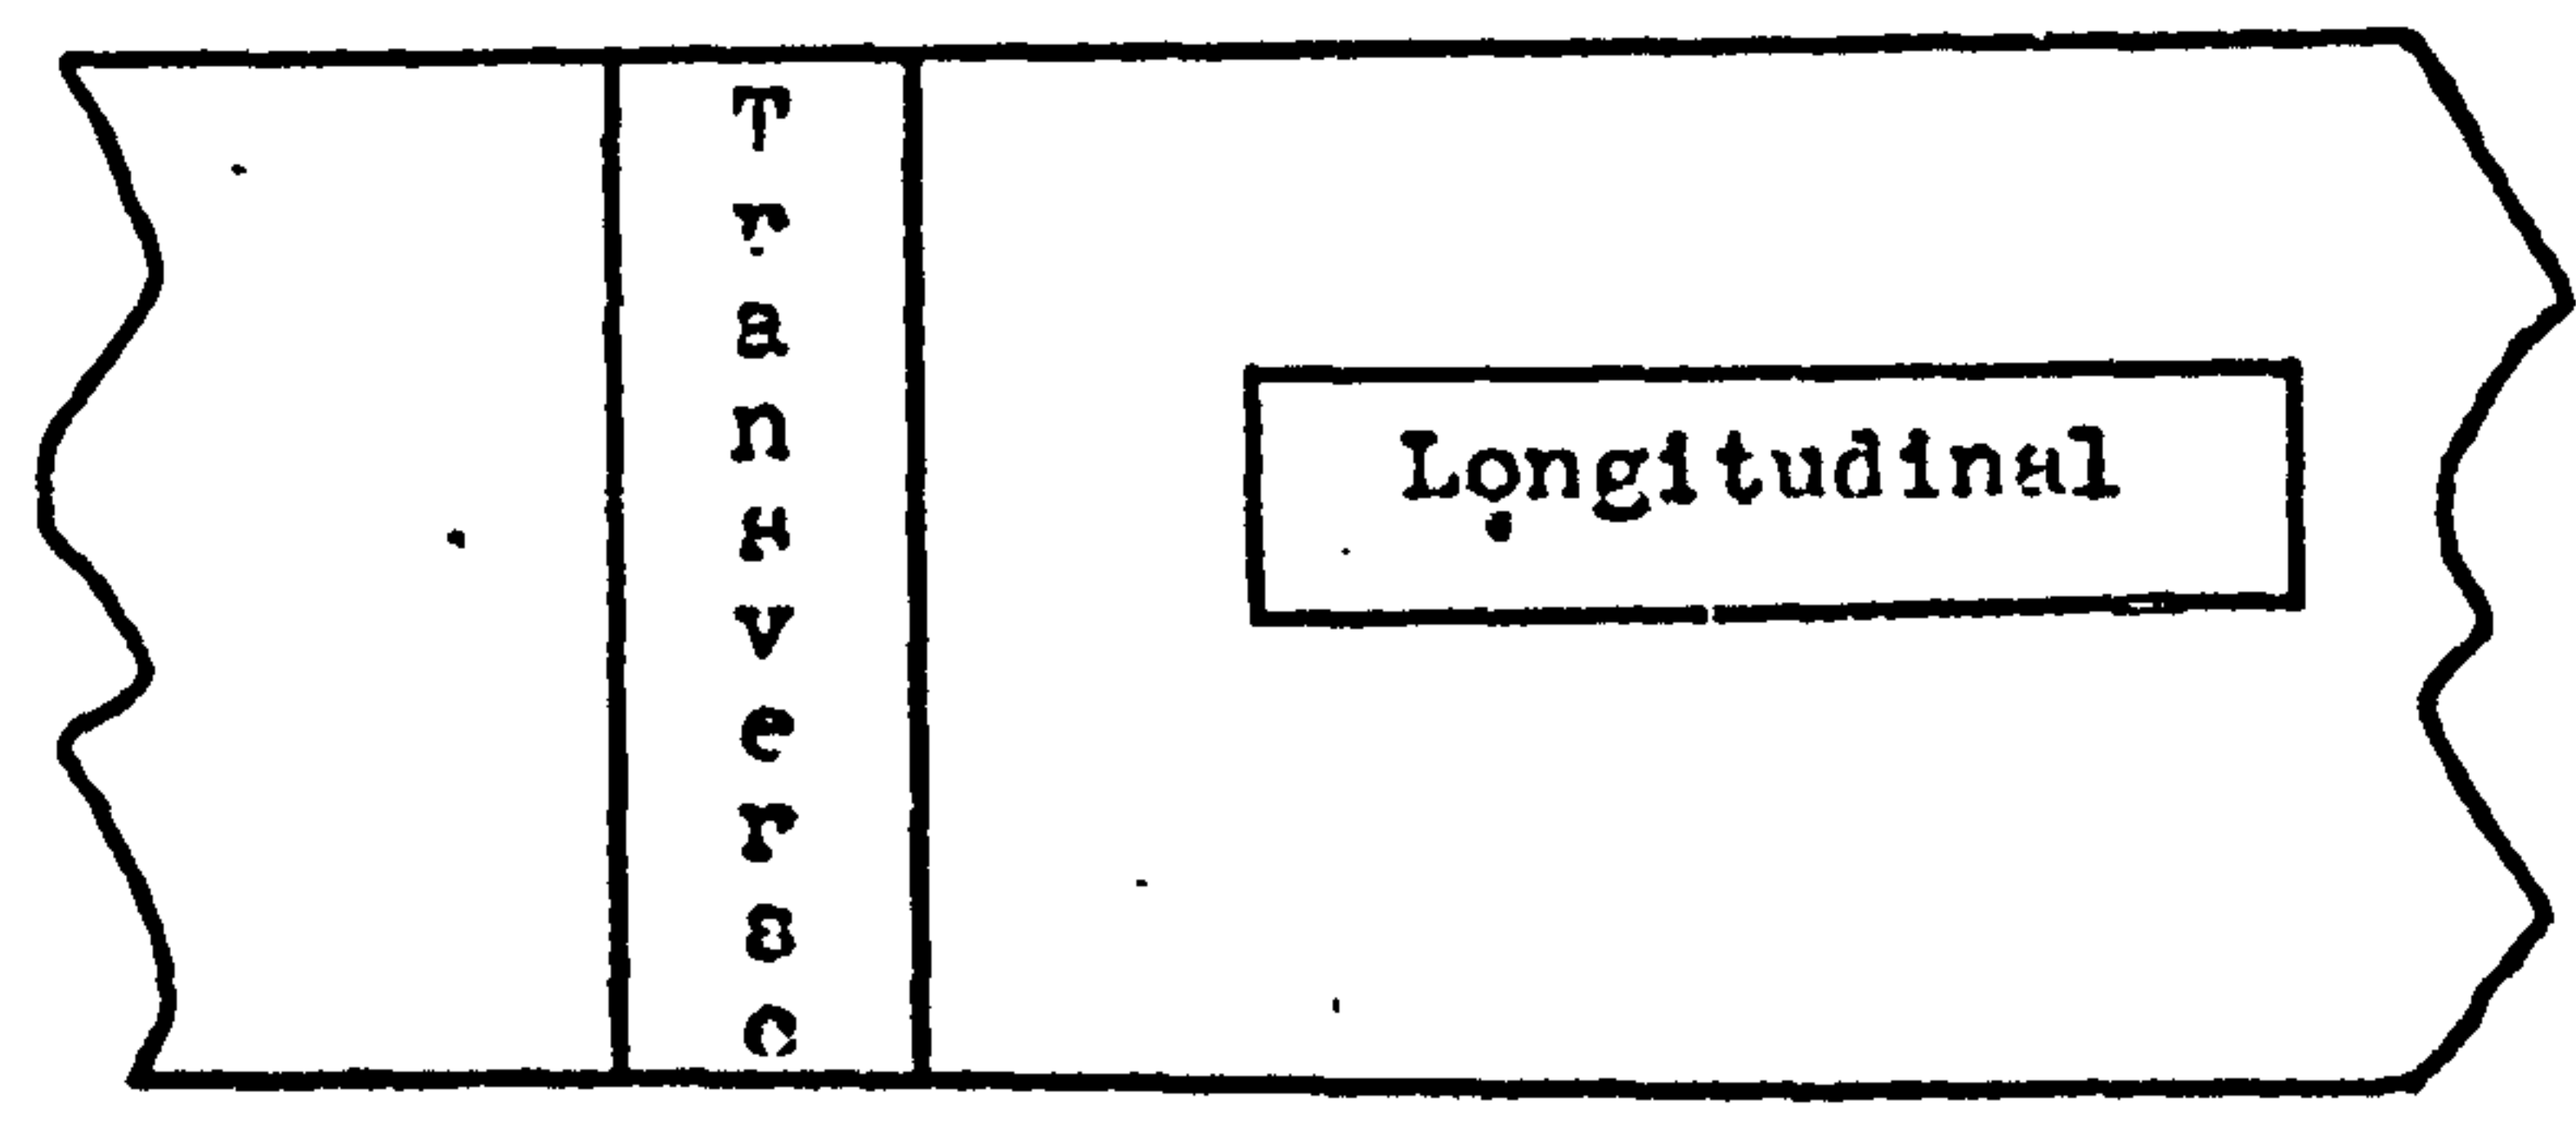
Location of Mechanical Test Pieces in Rolled Alloys.
